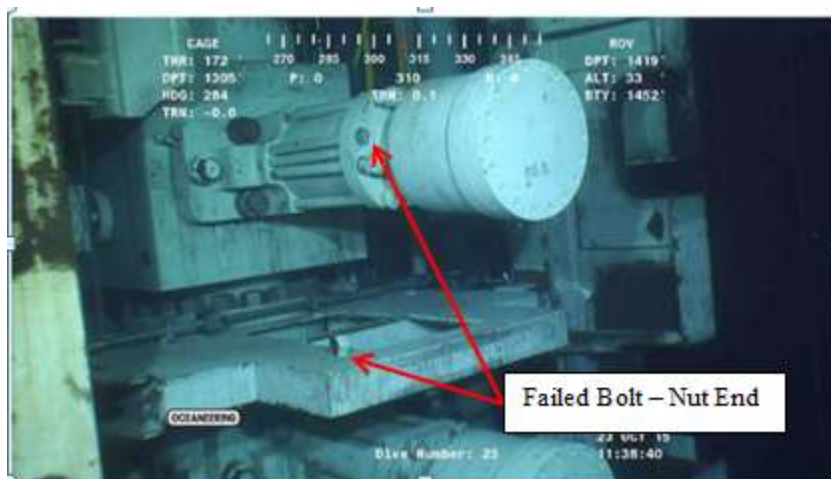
LOWER BOP BSR ASSEMBLY (OEM RCA)
